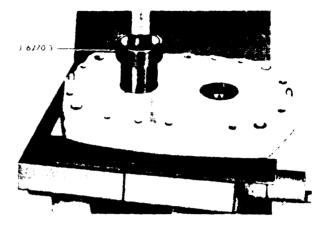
D-10. Removing Seal Ring and Bearing from End Plate
